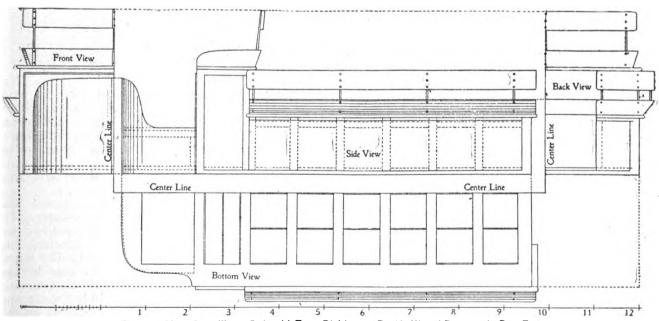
A Motor Store Wagon Body with Front Division and Double Hinged Doors on the Rear End.
